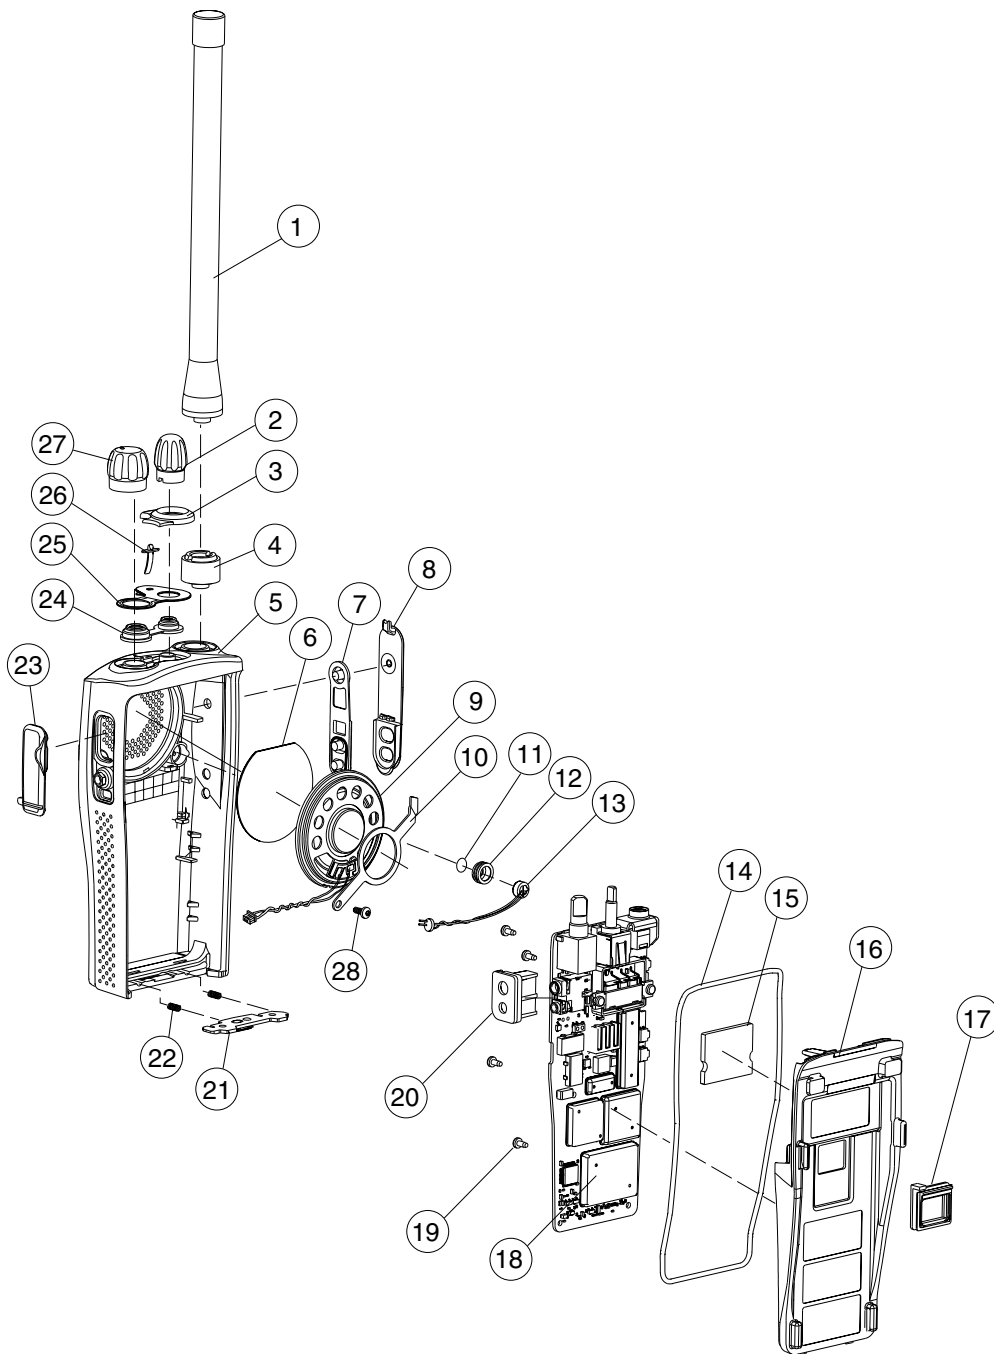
CP140 Non-Keypad Radio Exploded View
